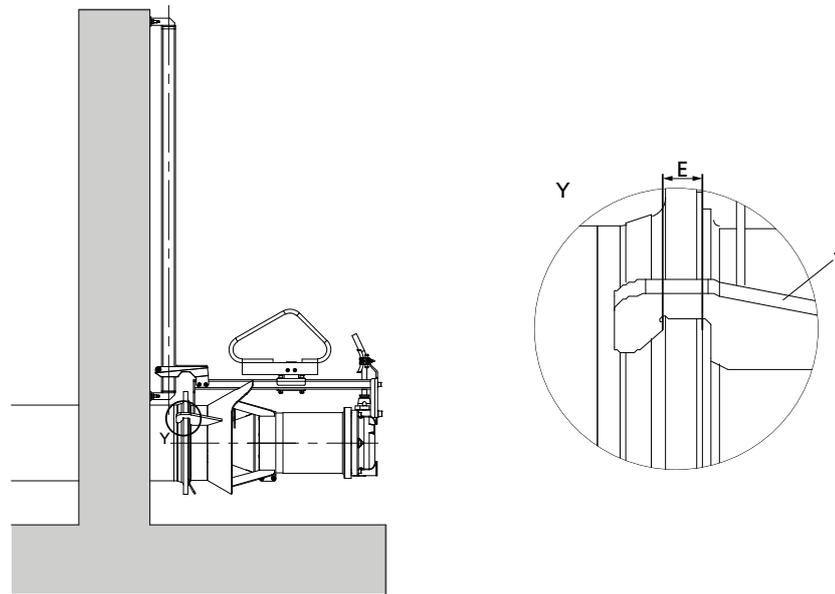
Mounting a new pump set to an existing guide rail and connection pipe
